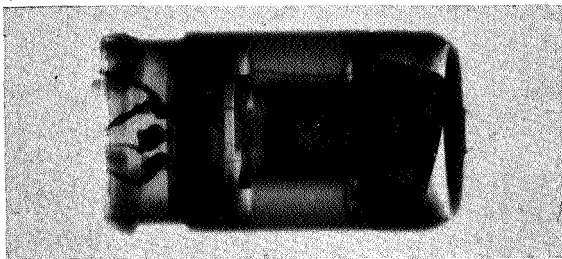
Radiograph of Electron Gun Design No. 1 taken after impact tests . Assembly damage included cracked header ceramic breaking vacuum seal; broken anode ceramic and displaced anode electrode; displaced cathode assembly; change in cathode radius of curvature; loss of heater lead connection; and loss of cathode coating.
